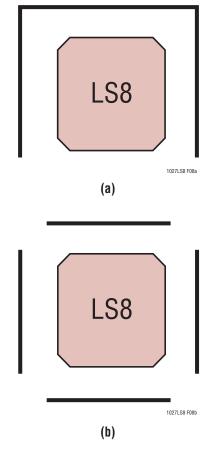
(a) 3-Sided PCB Tab Cutout, (b) 4-Sided PCB Cutout. Lines Represent Cuts All the Way Through the PCB
